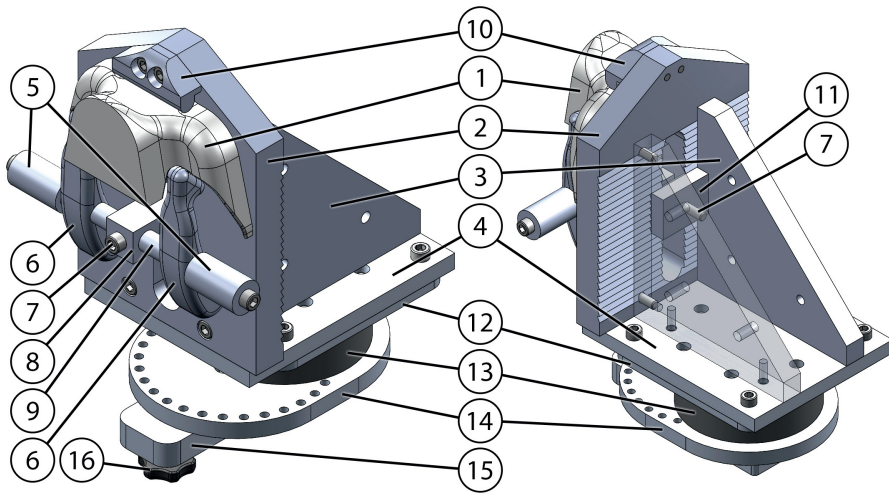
Holding device for upper jaw: (1) upper jaw, (2) surface plate, (3) support plate, (4) ground plate, (5) axle boxes, (6) clamping arms, (7) clamping bolt, (8) sliding block, (9) clamp axis, (10) front block, (11) clamping nut, (12) top plate of sensor build-up, (13) force/torque sensor, (14) rotation plate, (15) bottom plate, (16) locking bolt
